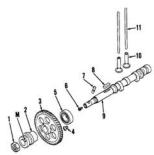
Exploded view of valve and fuel injection pump camshafts. Install injection pump camshaft so "O" mark (M) is facing out.
